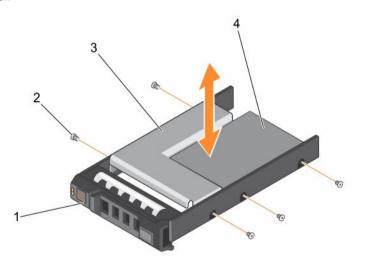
Removing and installing a 3.5-inch hard drive adapter into a 3.5-inch hot swappable hard drive carrier
